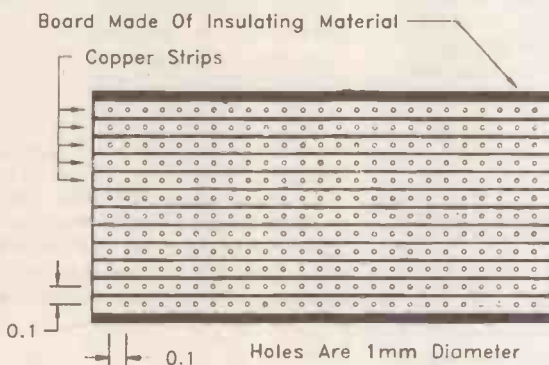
Stripboard has 1mm holes drilled on a 0.1in. (2.54mm) matrix, plus copper strips along the underside.
